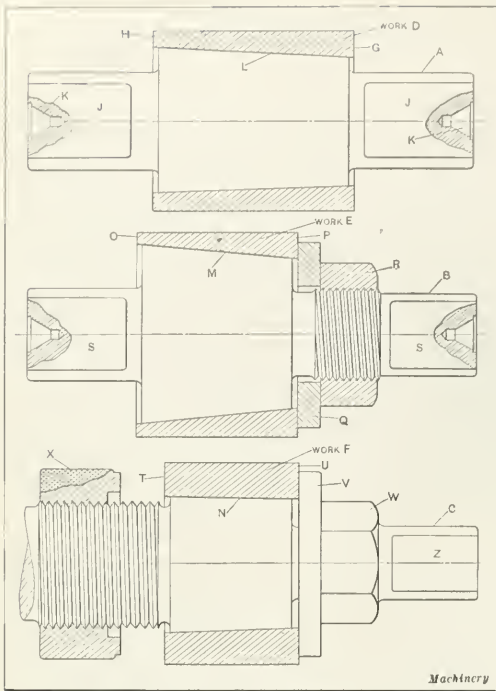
Methods of holding Work with Cylindrical Outer Surface and Tapered Hole
